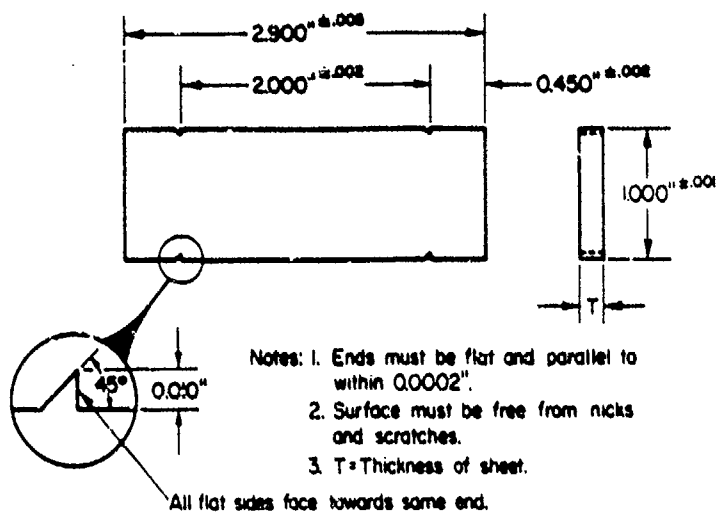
Compression specimen for Ti-15V-3Cr-3Sn-3Al sheet.
